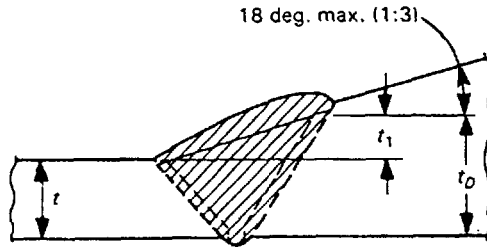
BEVEL FOR OUTSIDE THICKNESS¹⁻³
